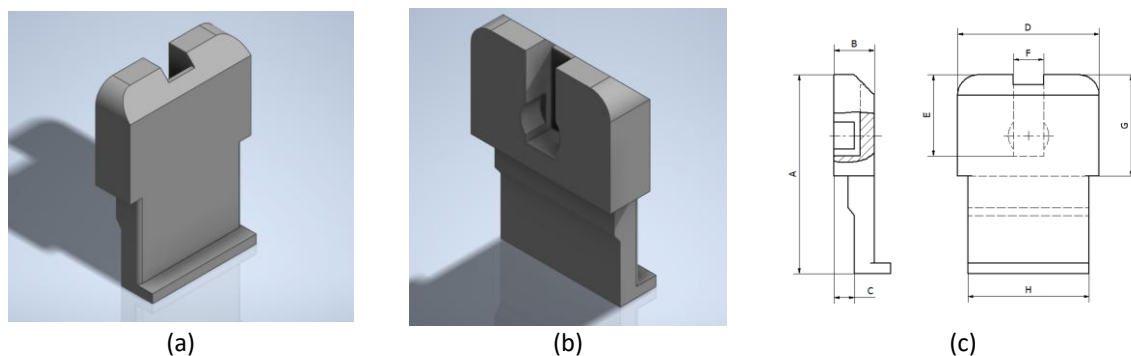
Geometry (a) isometric front view design, and (b) isometric back view design, and (c) detail dimension of design
